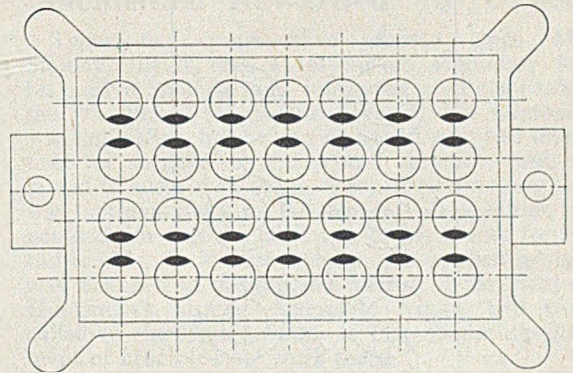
Drag Part of the Mould after Assembly of the Cores so that the Runner Inlets are Face-to-face.
